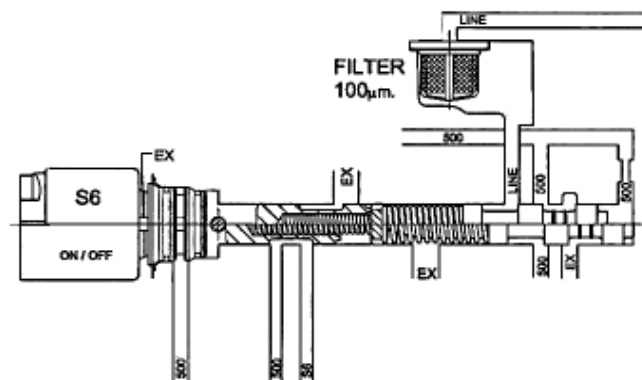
Electromagnetic pressure regulating valve and line pressure impelling valve
